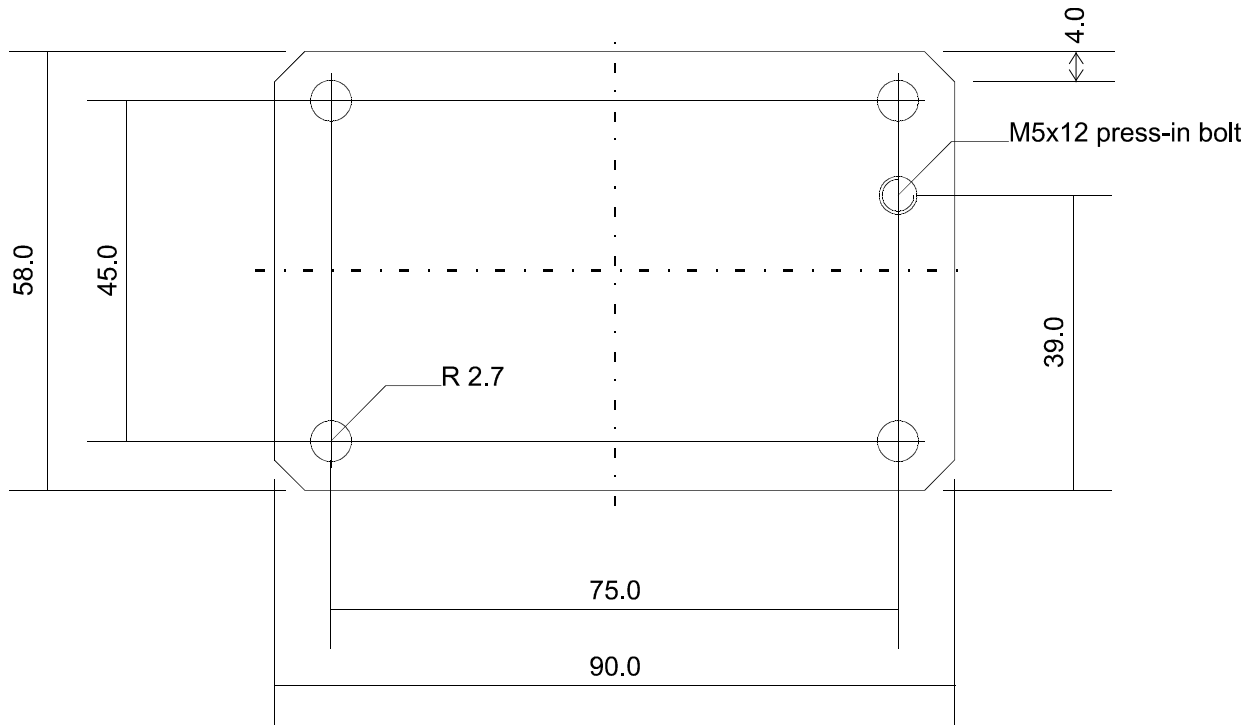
Dimensioned Sketch of the Basic Housing Plate
